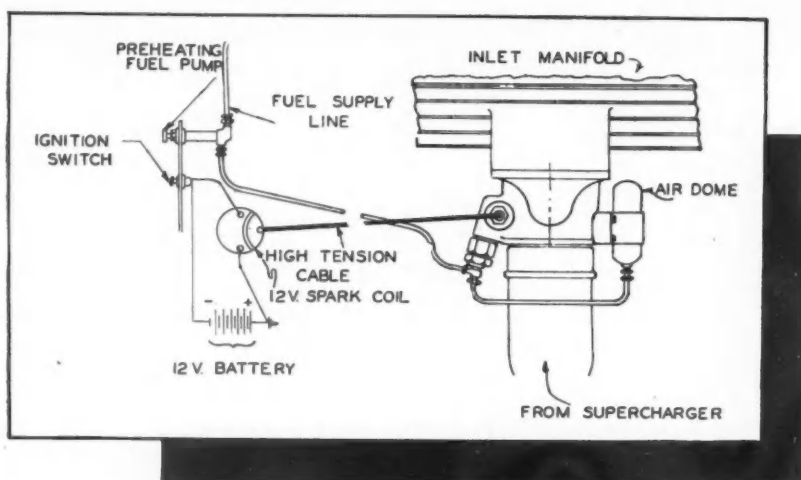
Flame primer installation on four-stroke engine, for heating air in inlet manifold.
